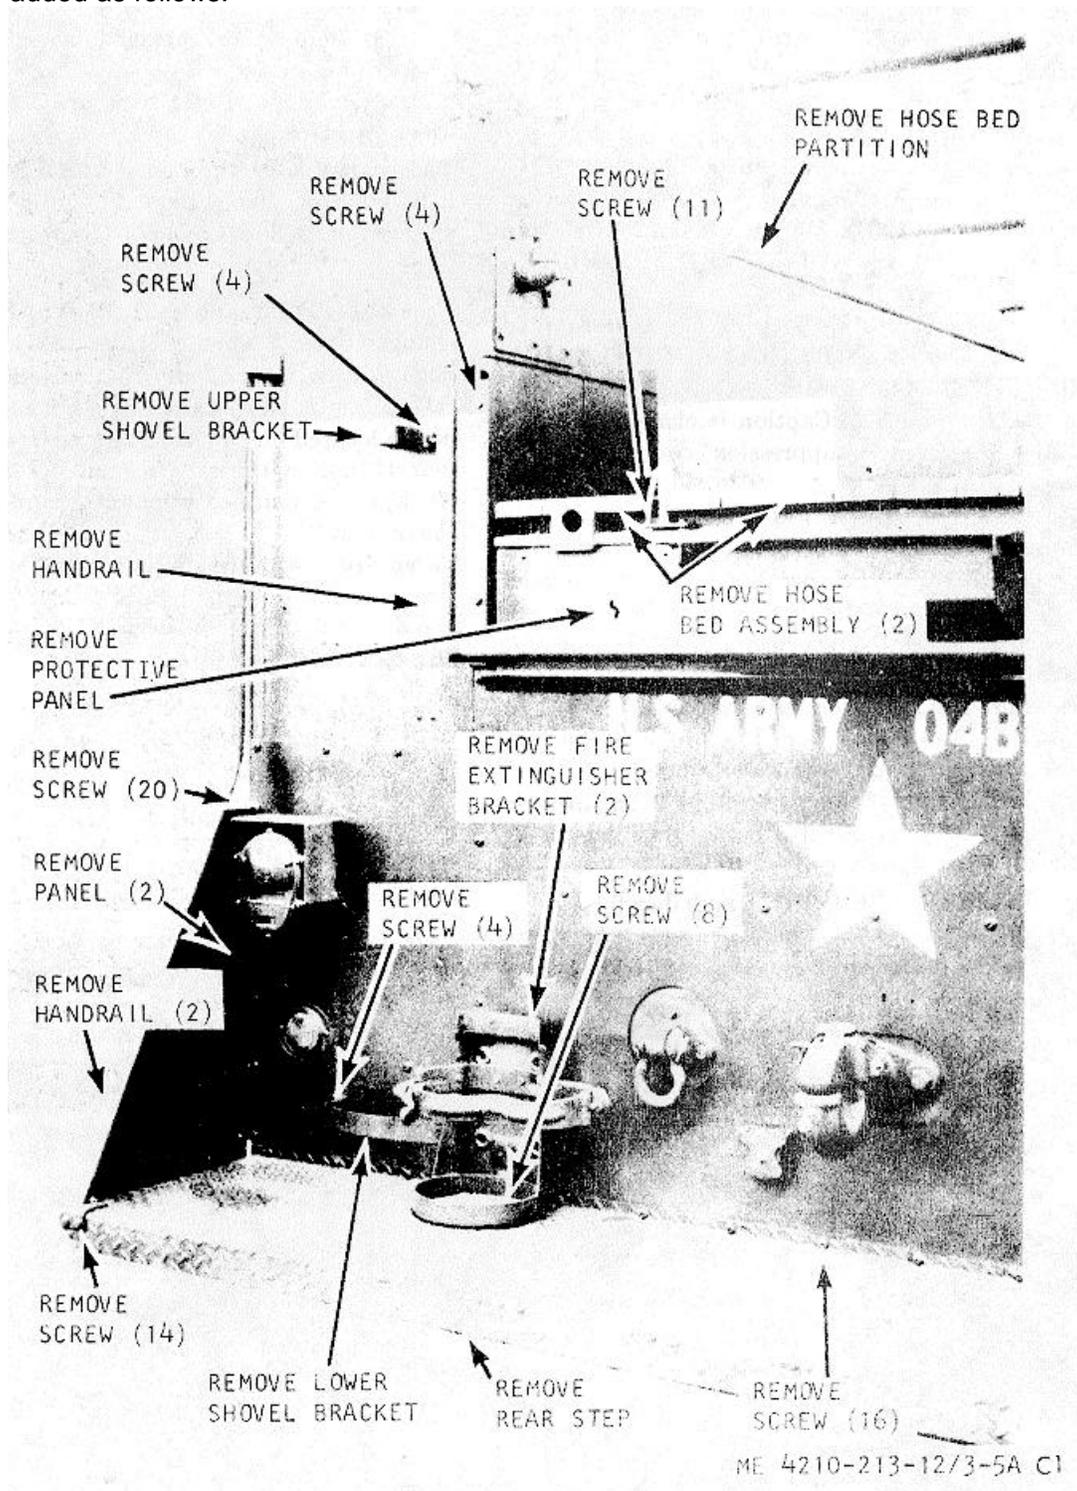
A. Hose bed assemblies, handrails, rear step, protective panel, and brackets, removal and installation for model FT-500.
